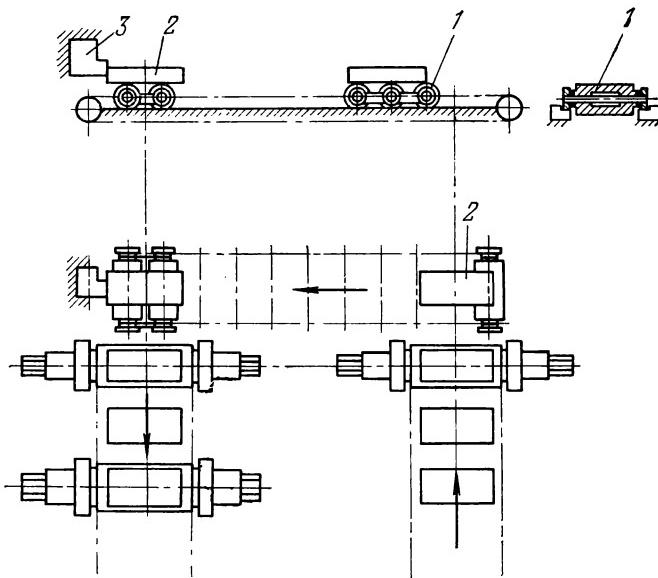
Principle of a progress-through stockpile bank for housing-type parts
